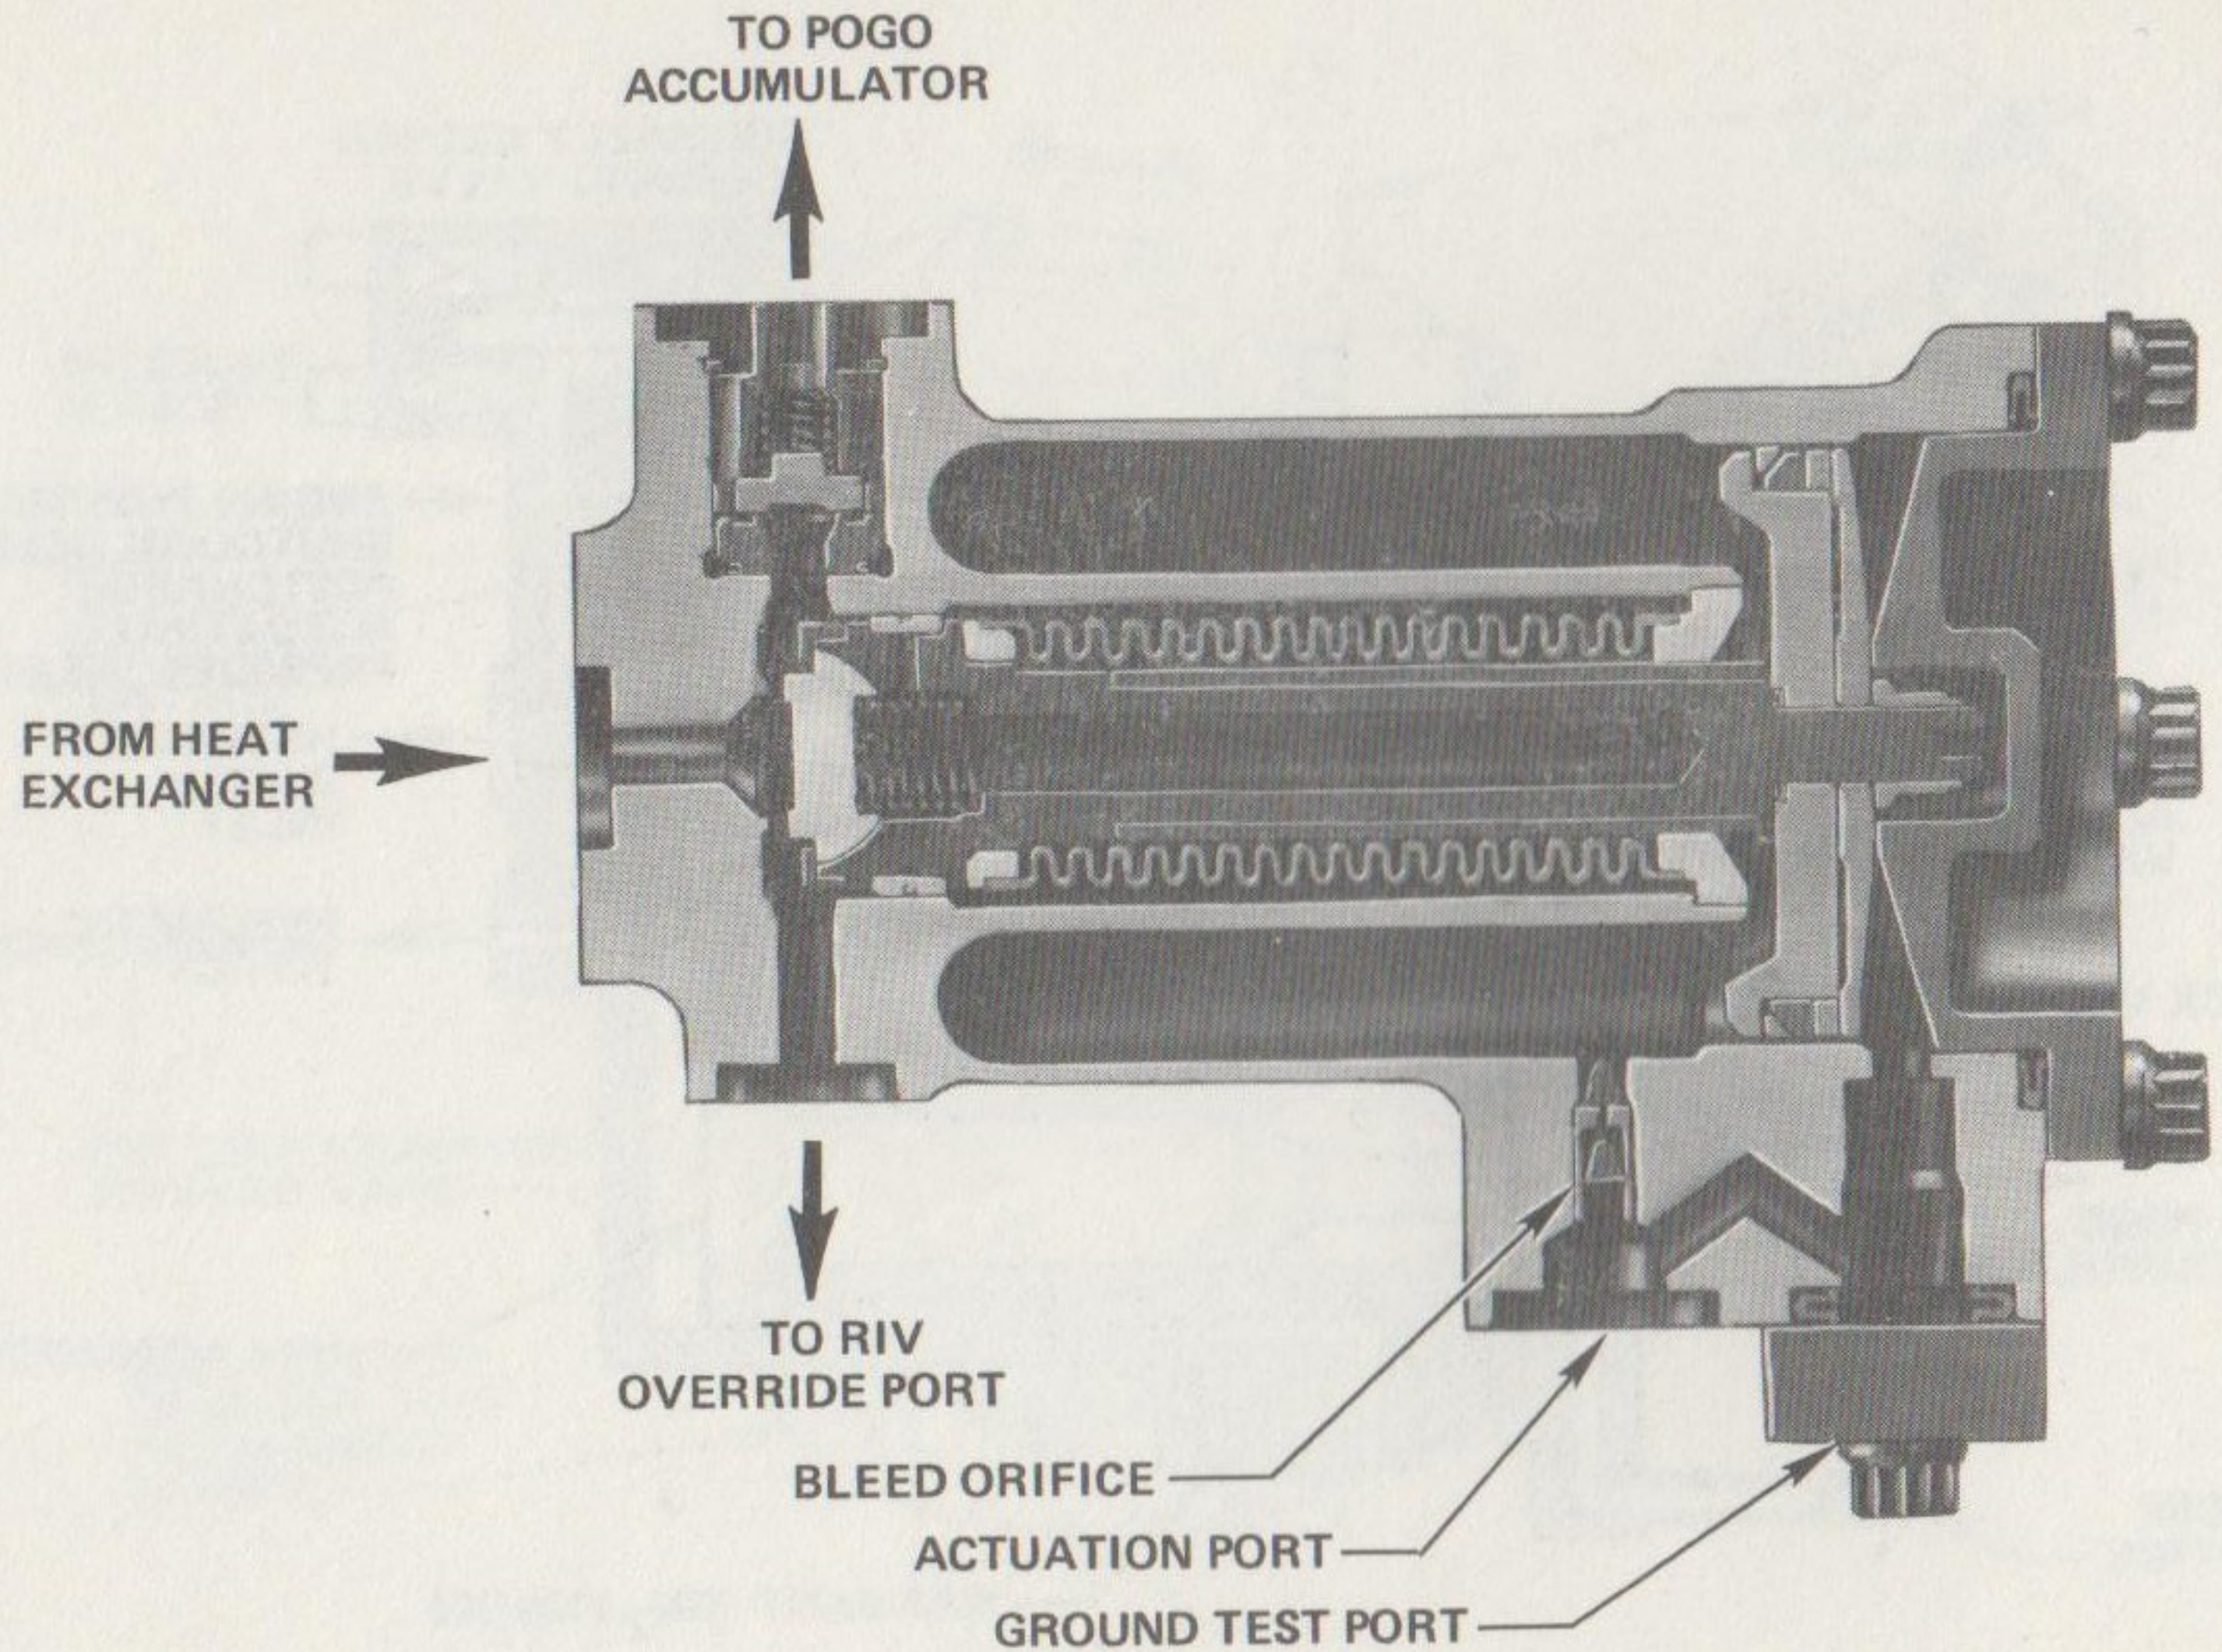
GASEOUS OXYGEN CONTROL VALVE
